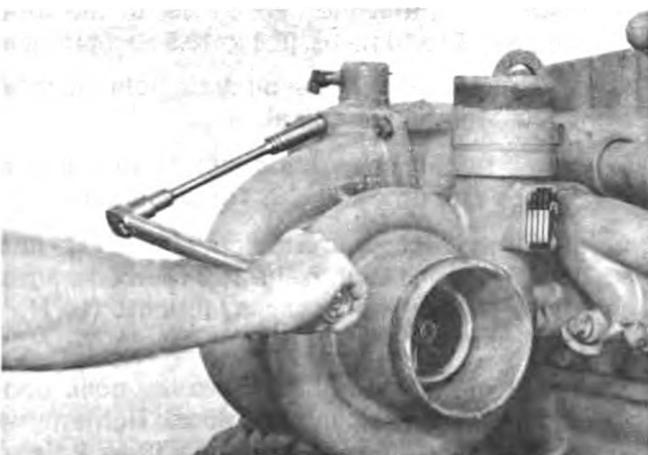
Install The Turbocharger Onto The Exhaust Manifold.
